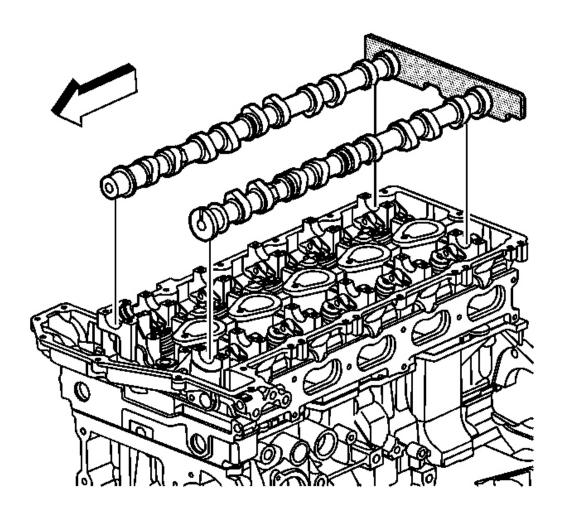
Installing J 44221 To Camshafts Courtesy of GENERAL MOTORS CORP.
